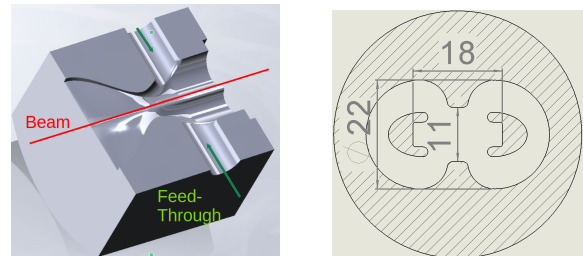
Left: Horizontal cut of the flange showing the complex shape of the transition. Right: Cross section of the central kicker part.
